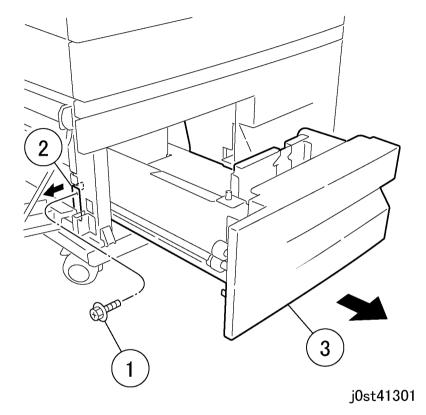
Removing the Tray 3 Assembly (j0st41301)
